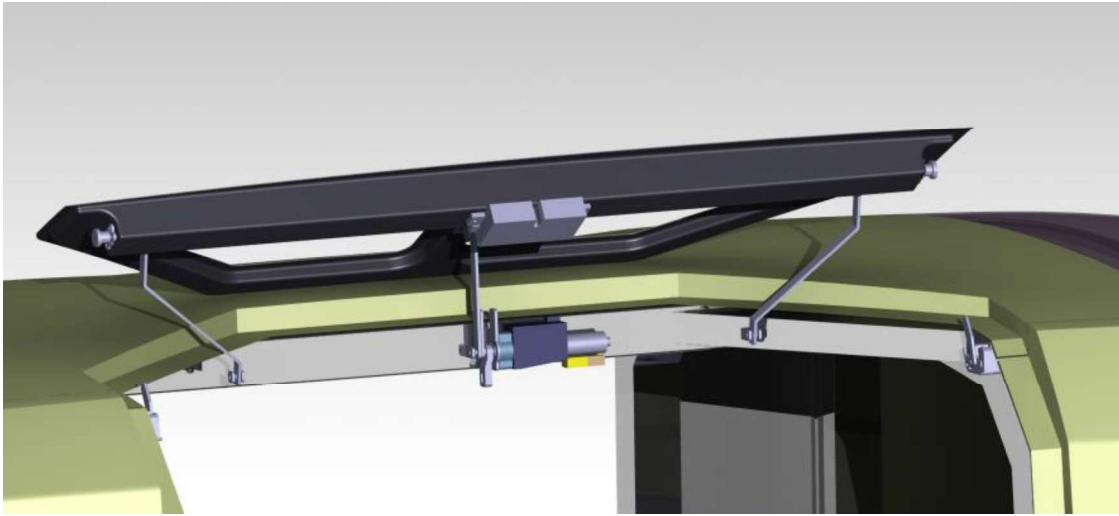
ROOF HATCH INSTALLED ON THE ROOF KINEMATICS [24]
